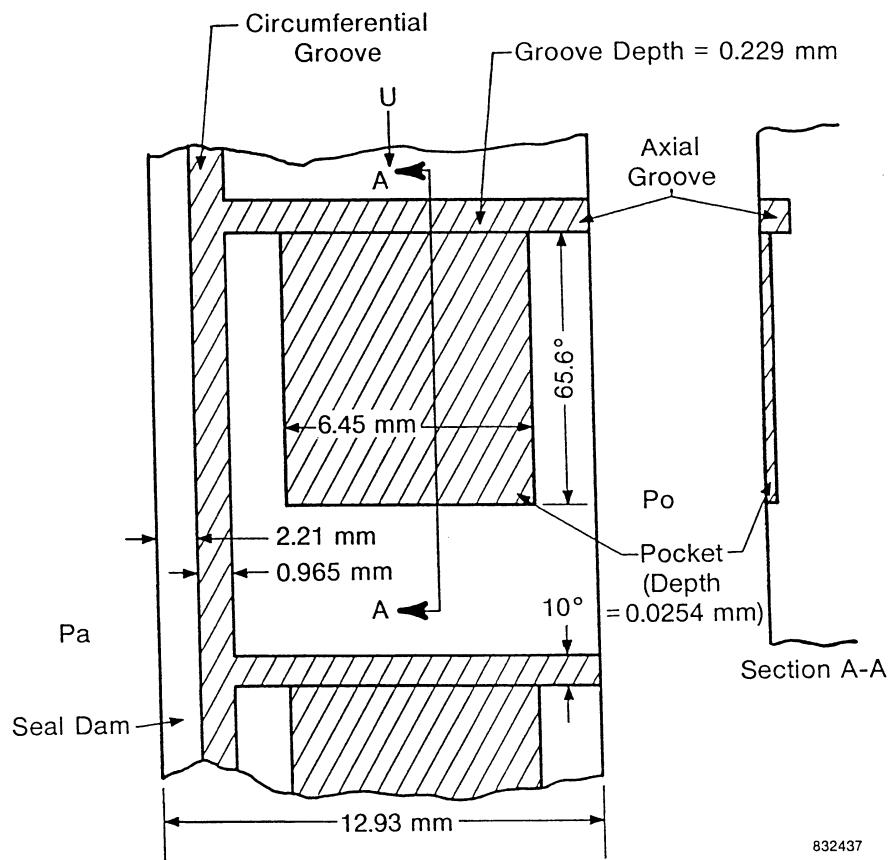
Developed View of 50-mm Rayleigh-Step Pad
